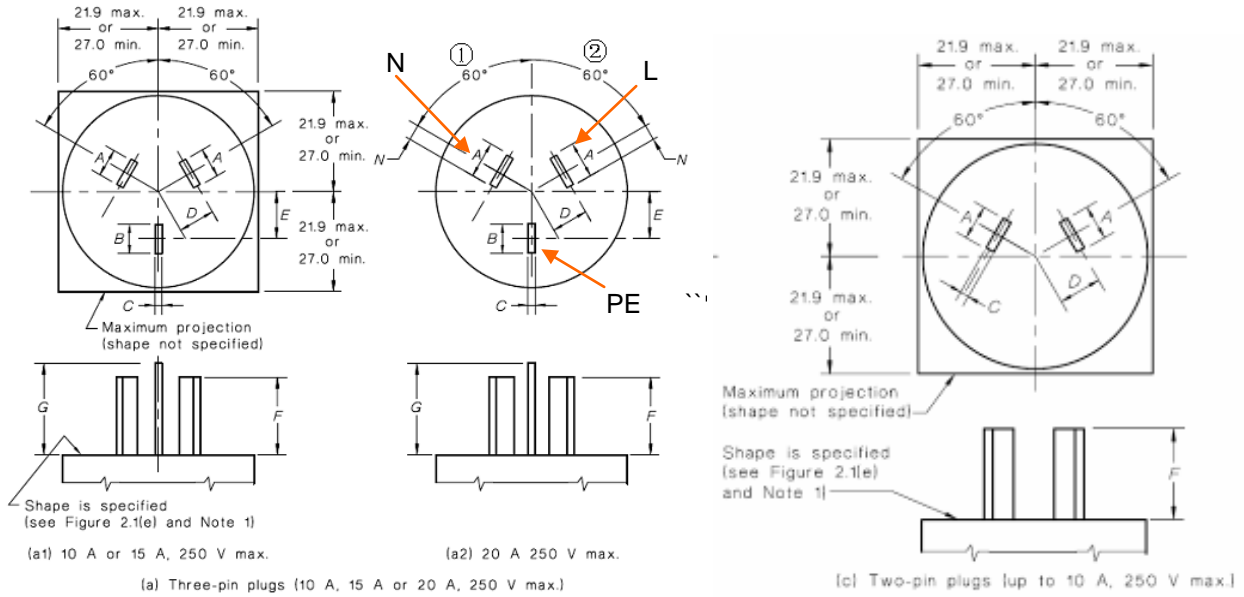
(in part) DIMENSIONS OF PLUGS
